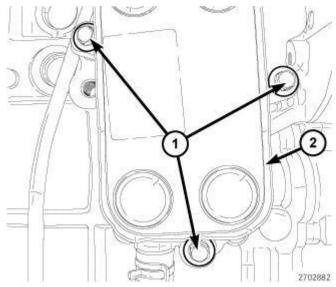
Coolant Hose, Oil Cooler Housing & Bolts Courtesy of CHRYSLER LLC
